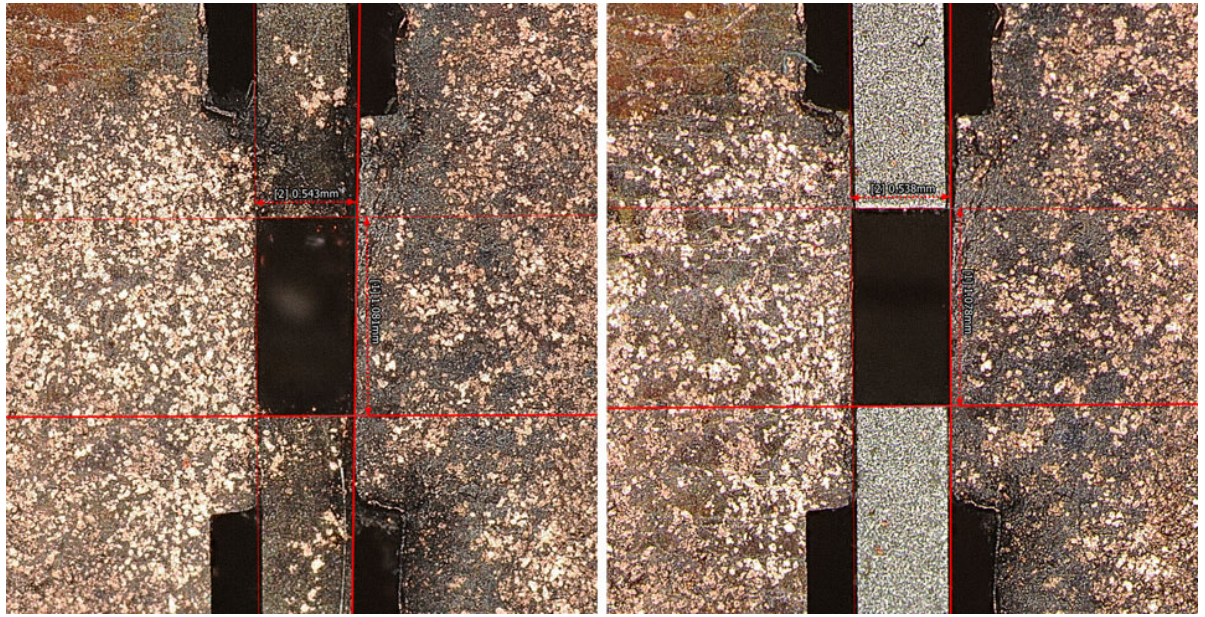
Nozzle exit dimensions before (left) and after (right) reassembly.
